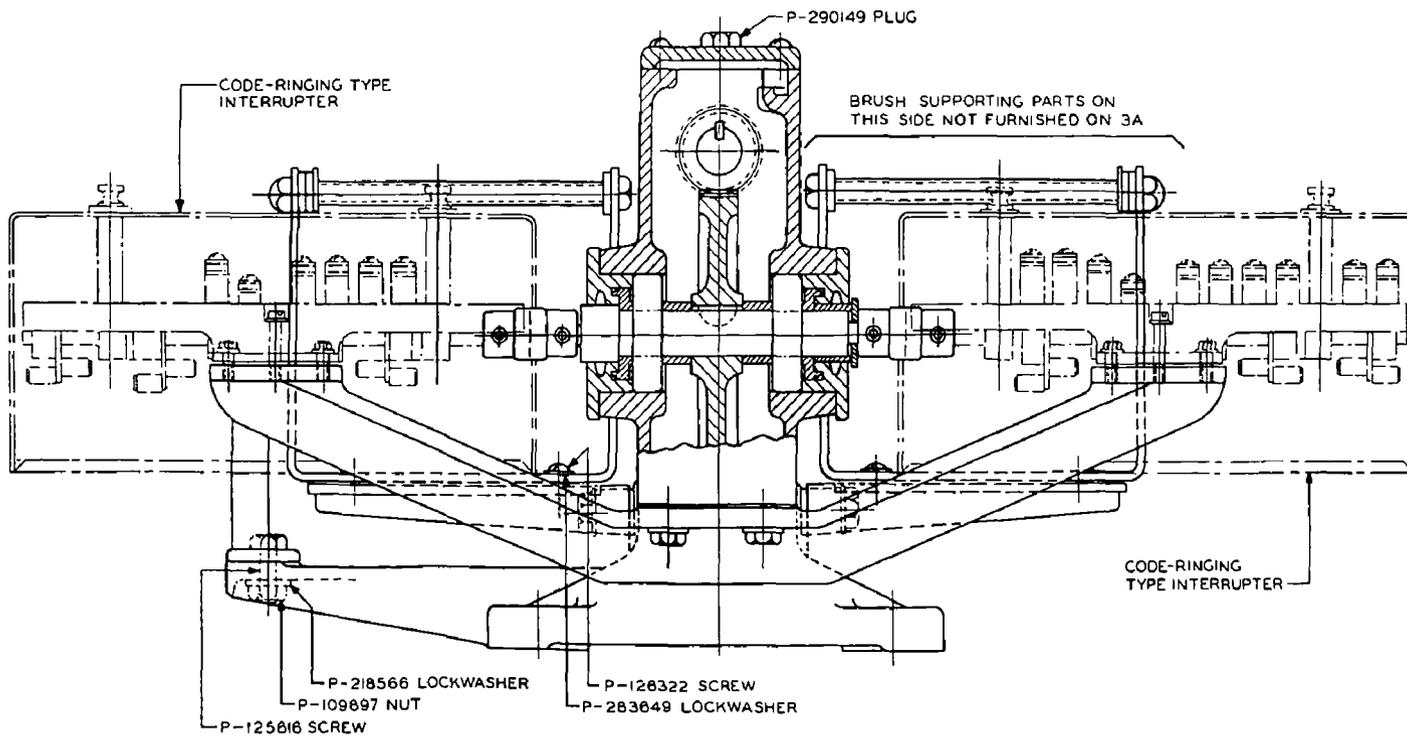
3A and 3B Interrupter Mounting—End View (For Top View See Fig. 12 and 13)
